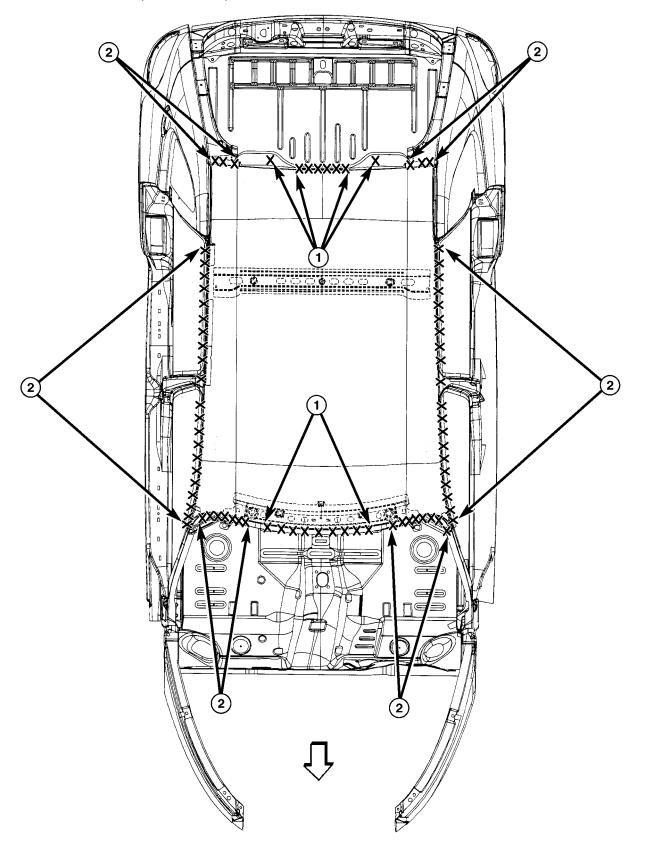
OUTER ROOF PANEL TO BODY SIDE APERTURE WINDSHIELD FRAME AND LIFTGATE
